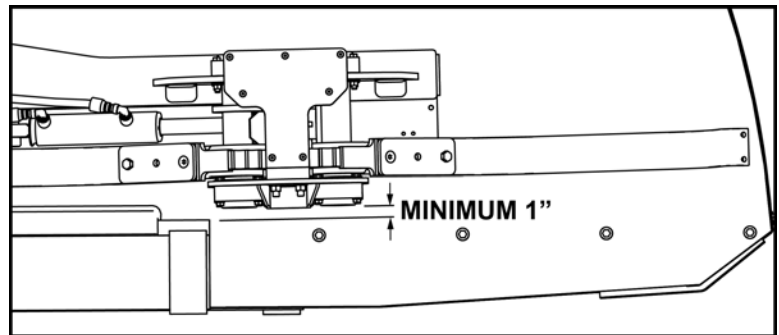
Mechanical on Curotto-Can Assemblies Weekly Check Fork Clearance
